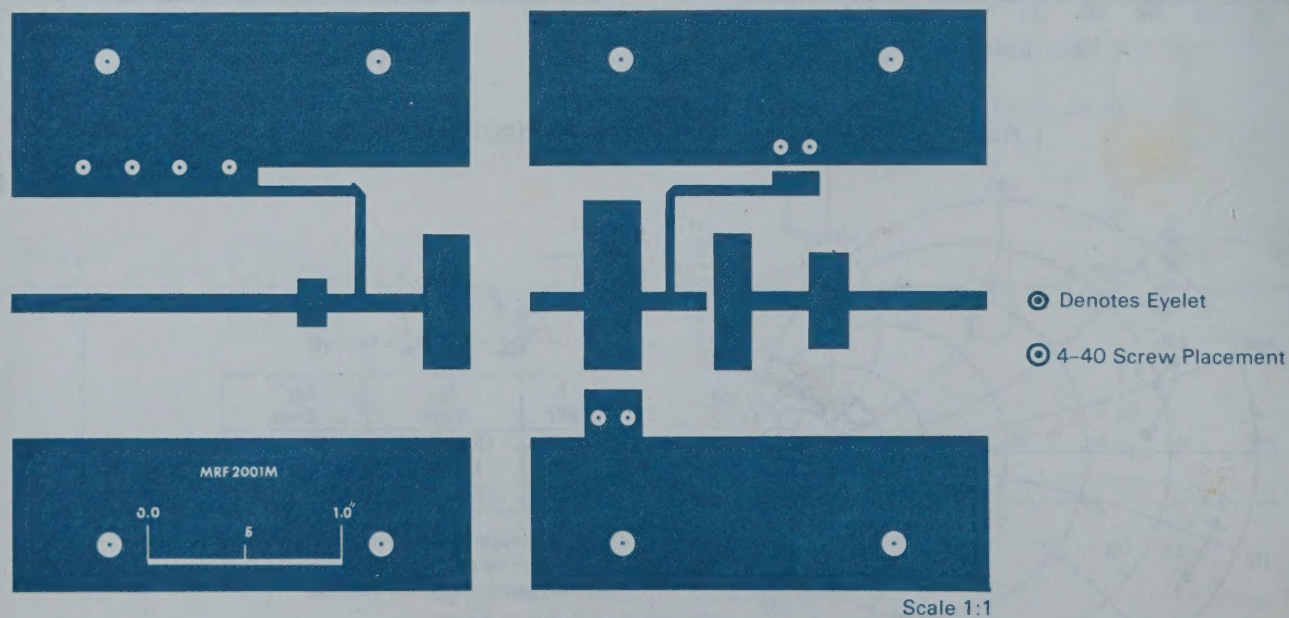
PRINTED CIRCUIT BOARD LAYOUT — 2.0 GHz TEST CIRCUIT
